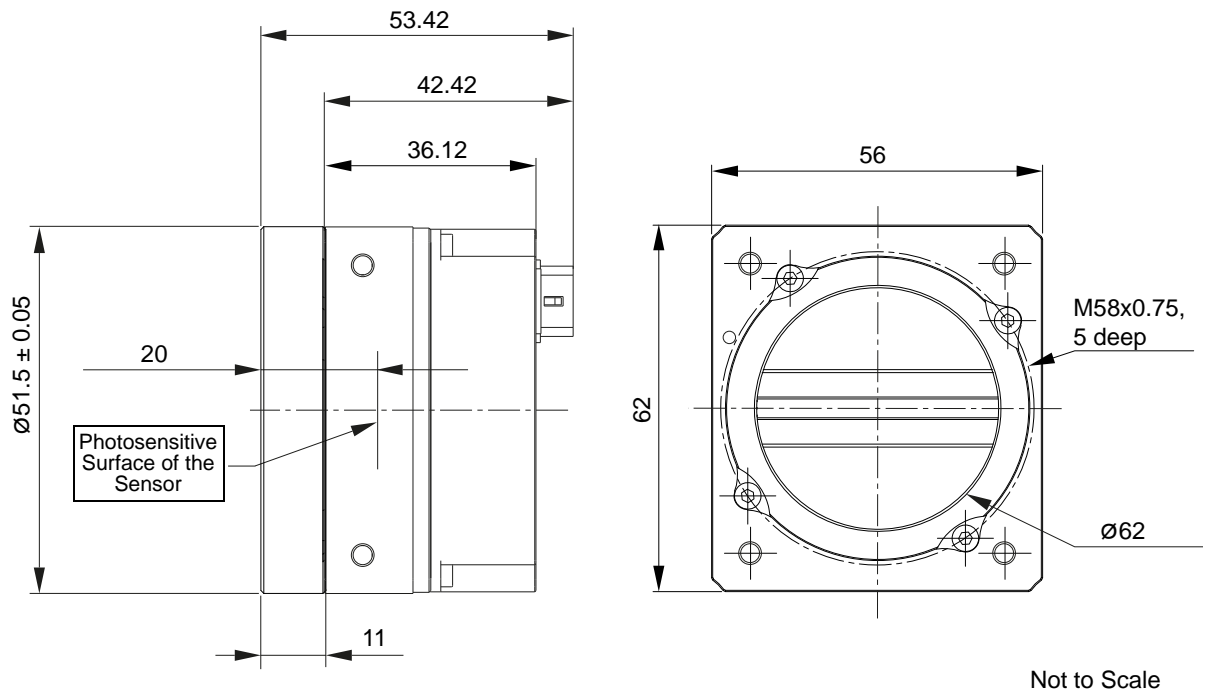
M58 x 0.75 Mount Adapter on a racer GigE Camera; Dimensions in mm
